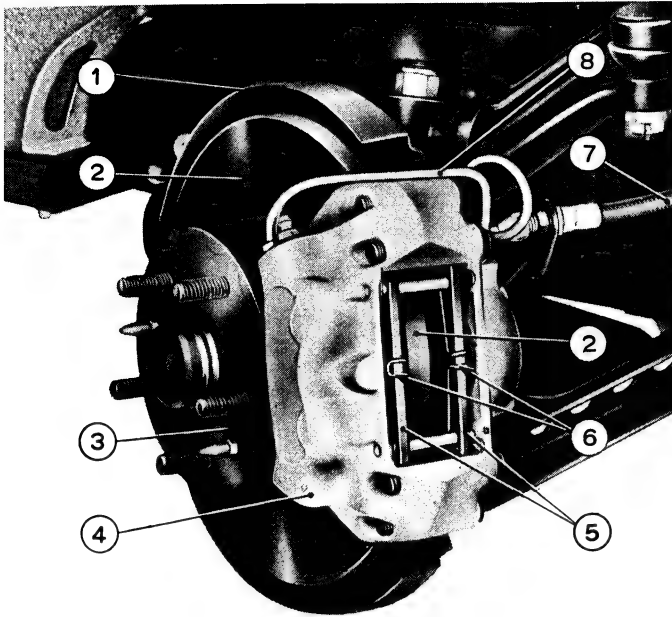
Left front wheel disc brake - 1600 S Cabriolet.
